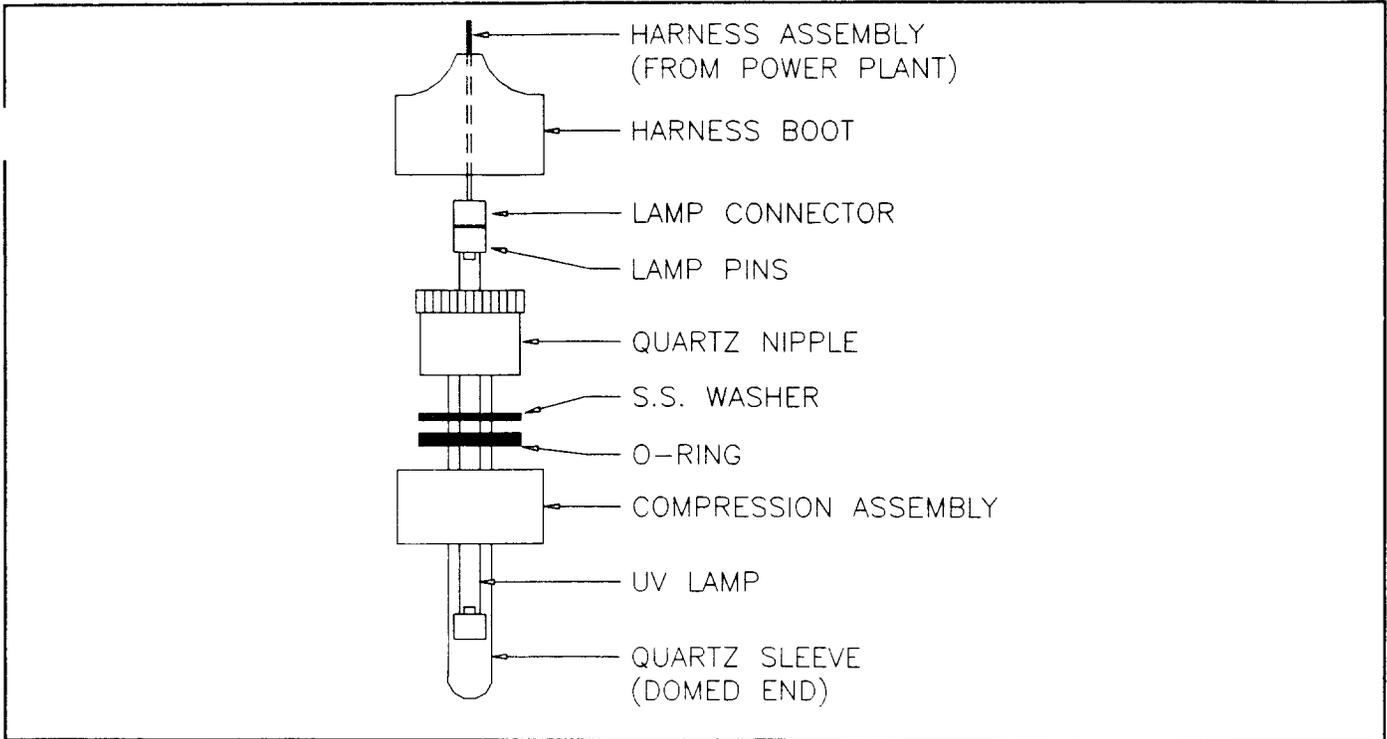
UV Lamp/Closed End Quartz Sleeve Assembly
